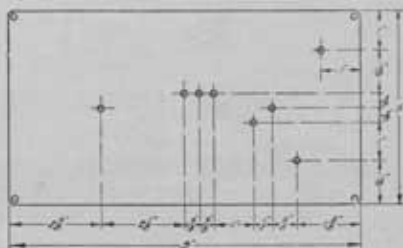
THE DRILLING PLAN FOR PANEL 12.
